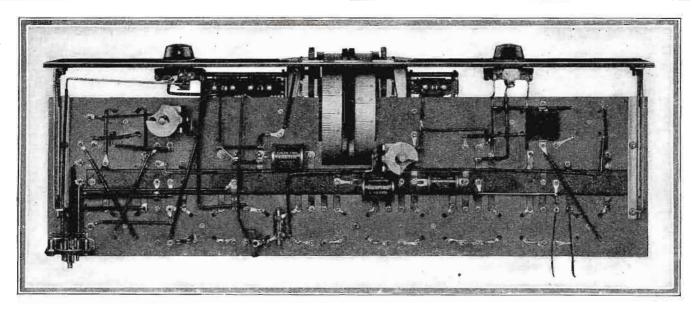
Photo D-Bottom view showing position of Kurz-Kasch capacity connector
